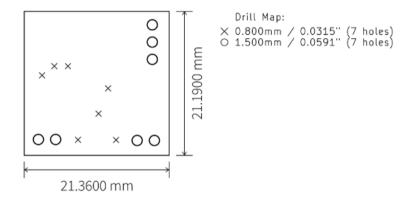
Fabrication drawing (drill drawing view) of the Motor Slave module.
